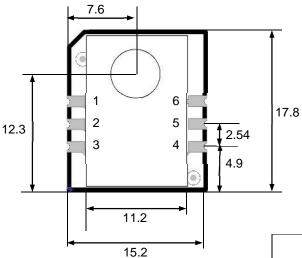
iAQ-engine sensor (dimensions in mm, Top View)
